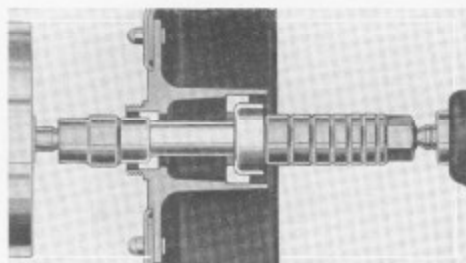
Self-Centering Mandrel and Universal Bearing Adapters in Ball Bearing Cups
